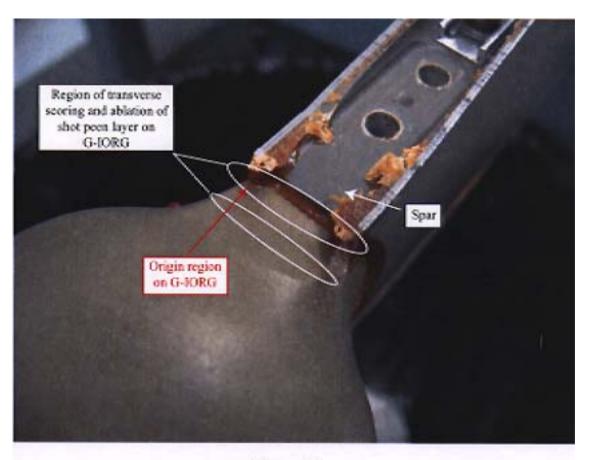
Blade root at inboard end of spar, before clean-up of excess adhesive and final dressing of blade
